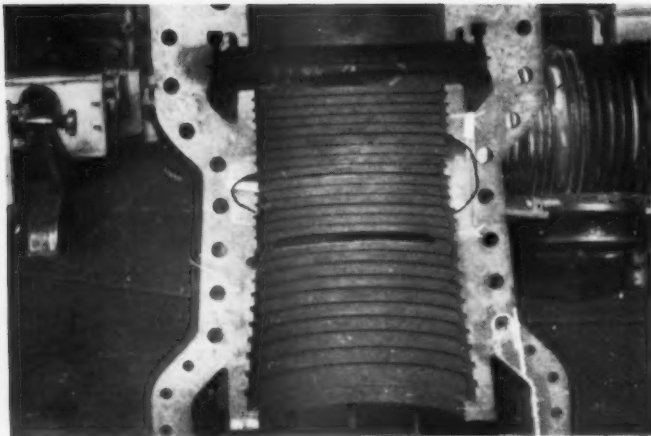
Rough bored H. P. turbine casing after excavation of defects disclosed during finish machining of flanges.
